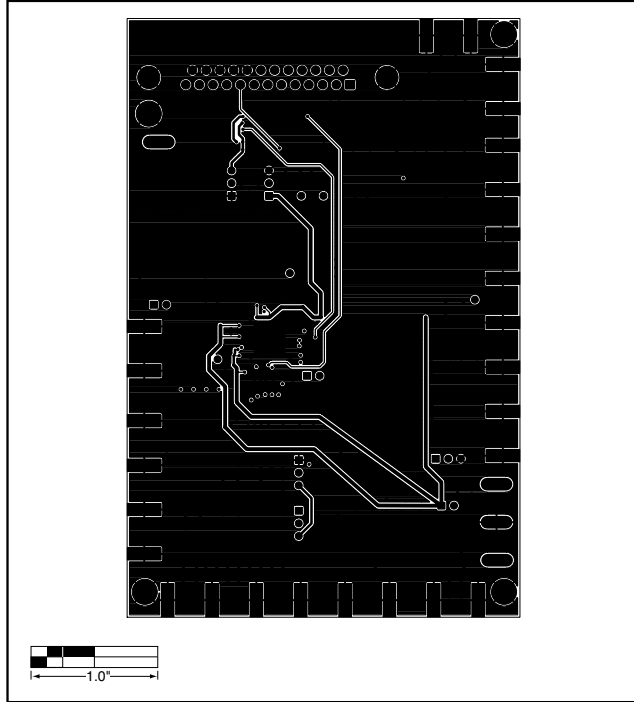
MAX2745 EV Kit PC Board Layout—Secondary Side
